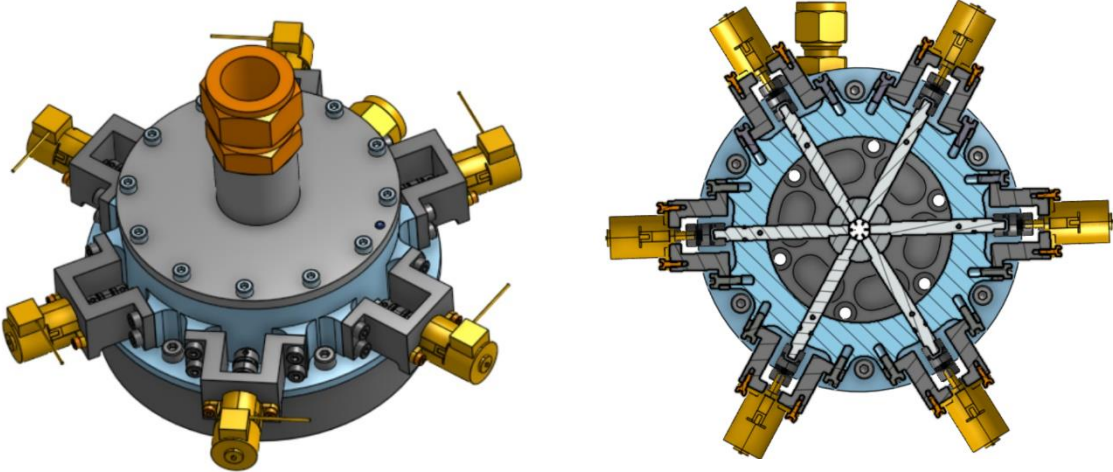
Final design of the VIGV direct drive mechanism: External view (left) and Cut View (right)
